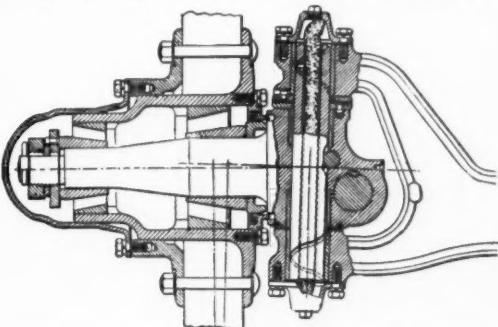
Wick lubrication of knuckle pin bearings on Class B war truck
